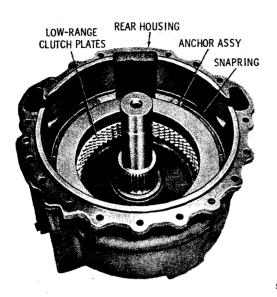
Rear housing and low-range clutch (TRT 2221-3, 2421-3 with underdrive)
